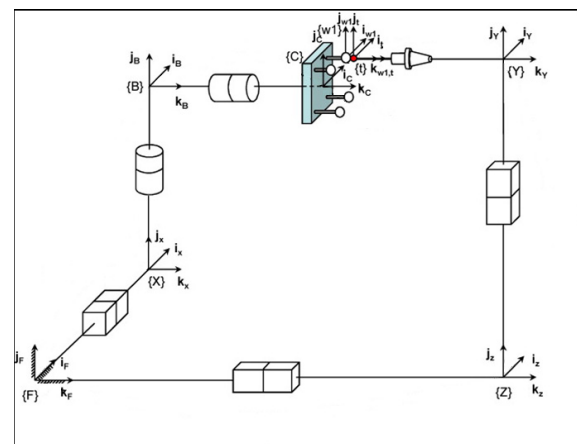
Nominal kinematic model of a five-axis machine tool with WCBXFZYT topology [13].
